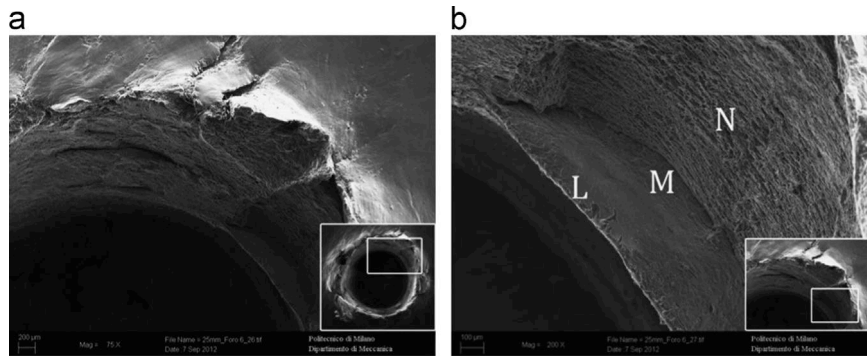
Magnifications of the 25 mm exit hole provoked by the tungsten core projectile: (a) petal and (b) fracture surface after the plug detachment.
